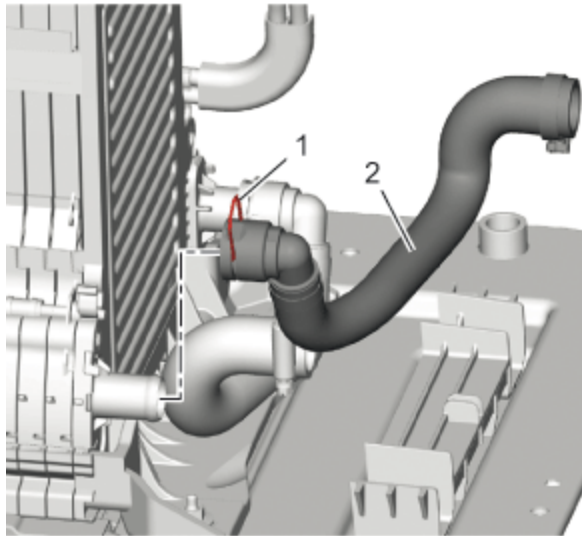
Cell Battery Cooling Manifold Inlet Hose
